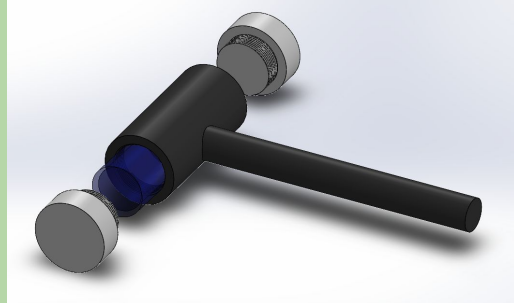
Orthopedic mallet design with replaceable caps, welded handle, and a flexible inner casing with metal bead media. Designed in Solidworks.
